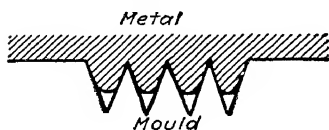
Surface tension of liquid metal preventing sharp castings.
